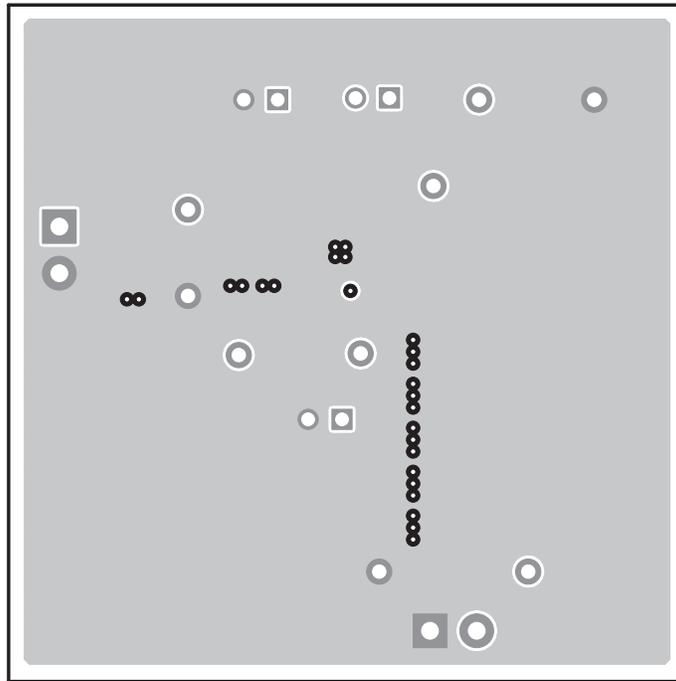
TPS54618EVM-606 Bottom-Side Layout
